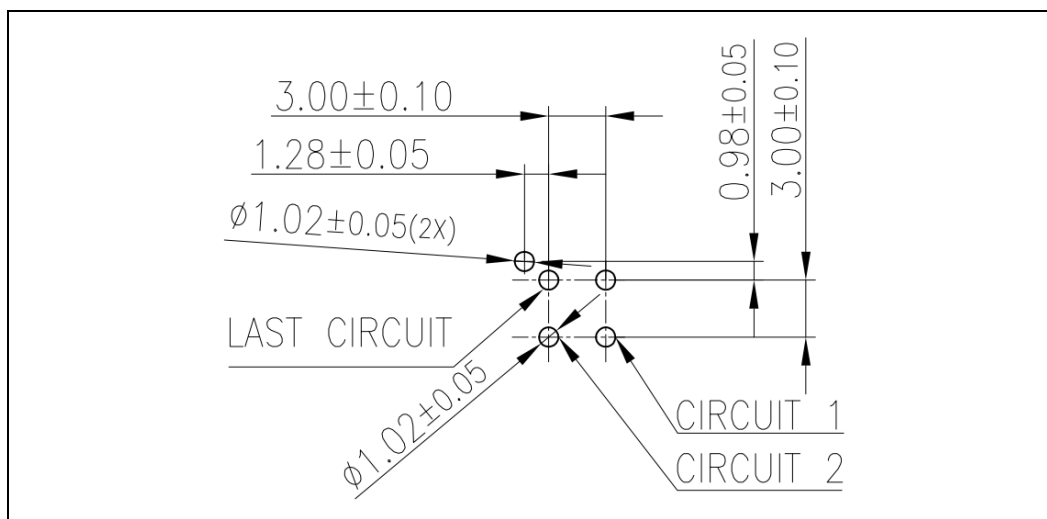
3 mm SATA Power 4 Pin MB Header – Recommended PCB Layout (Top Layer View)
